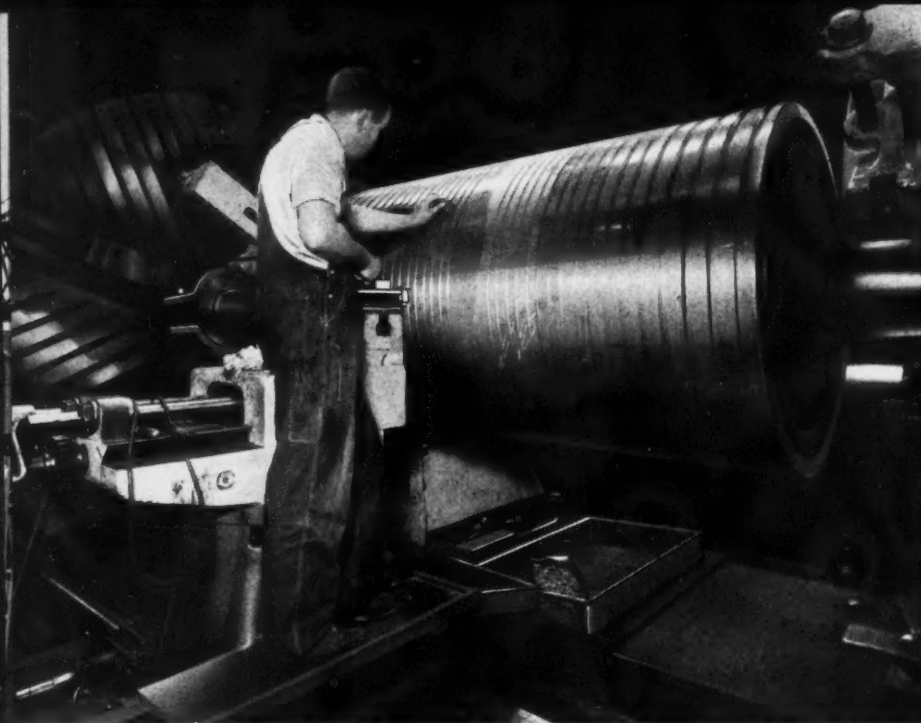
(Left) Gaging the Width of Blade Grooves on a Turbine Rotor. A Forming Tool is Used to Cut Serrations on Either Side of the Grooves to Hold the Blade Securely in Place
